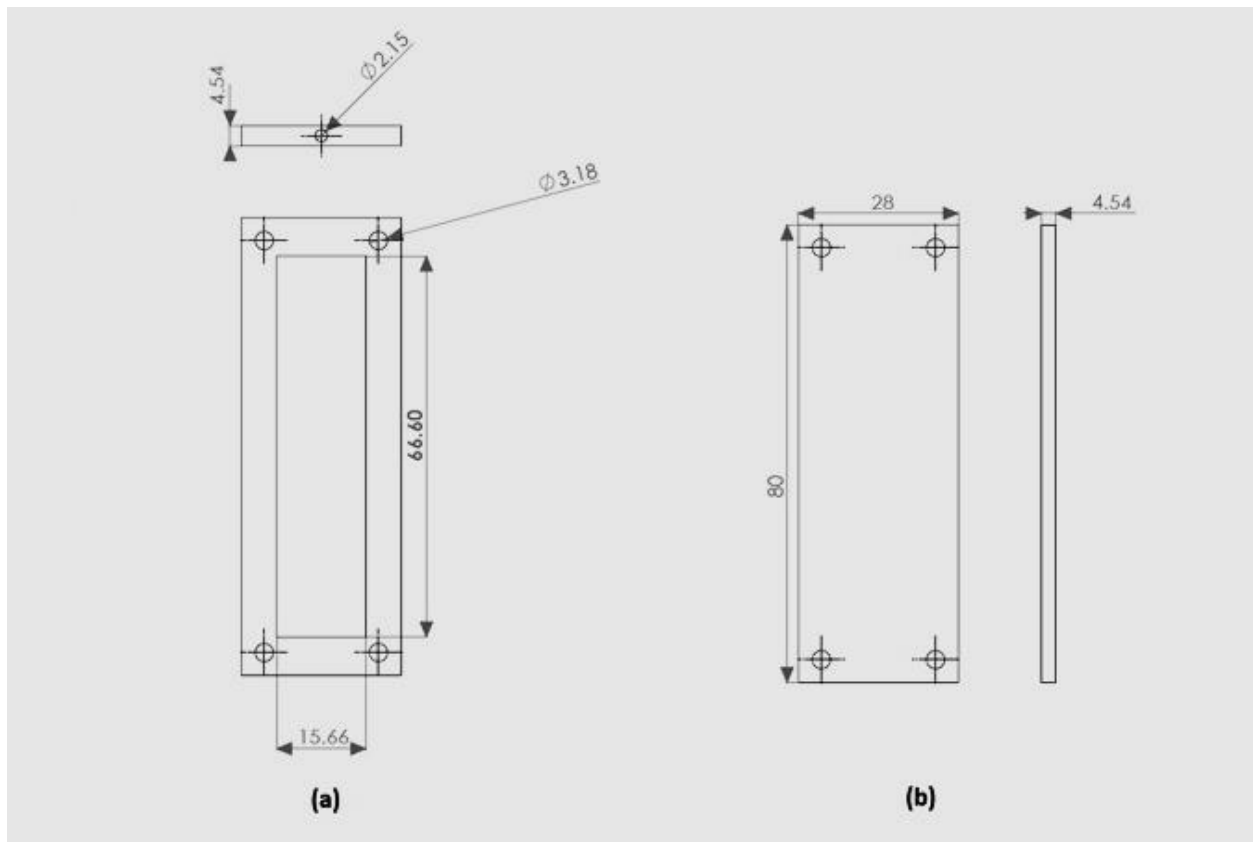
Dimensions of the mold. Figure (a): Middle plate. Figure (b): Top and bottom plate
